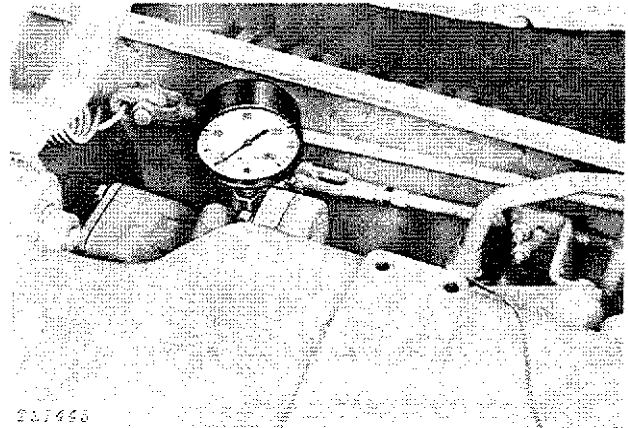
Checking Clutch Oil Pressure Regulating Valve
